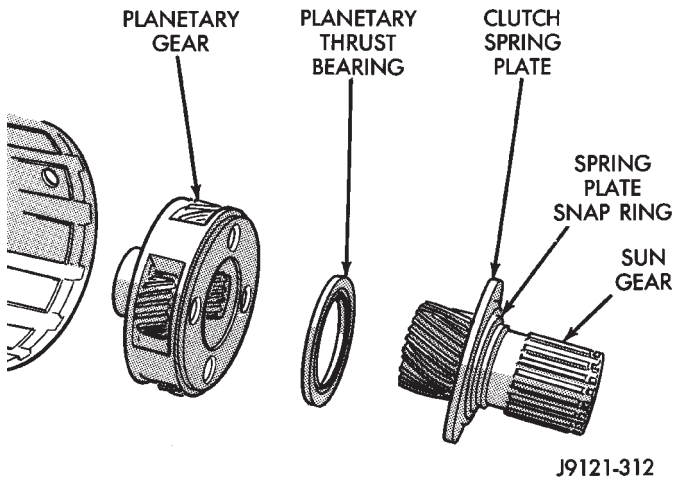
Removing Sun Gear, Thrust Bearing And Planetary Gear
